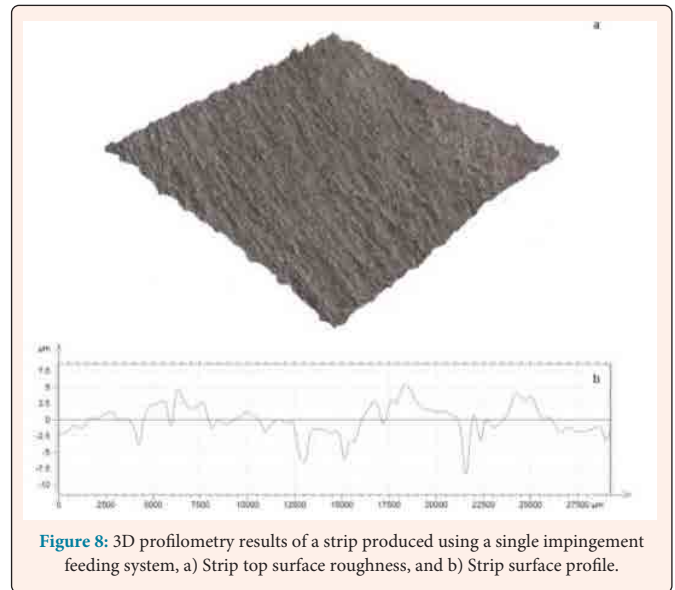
3D profilometry results of a strip produced using a single impingement feeding system, a) Strip top surface roughness, and b) Strip surface profile.
